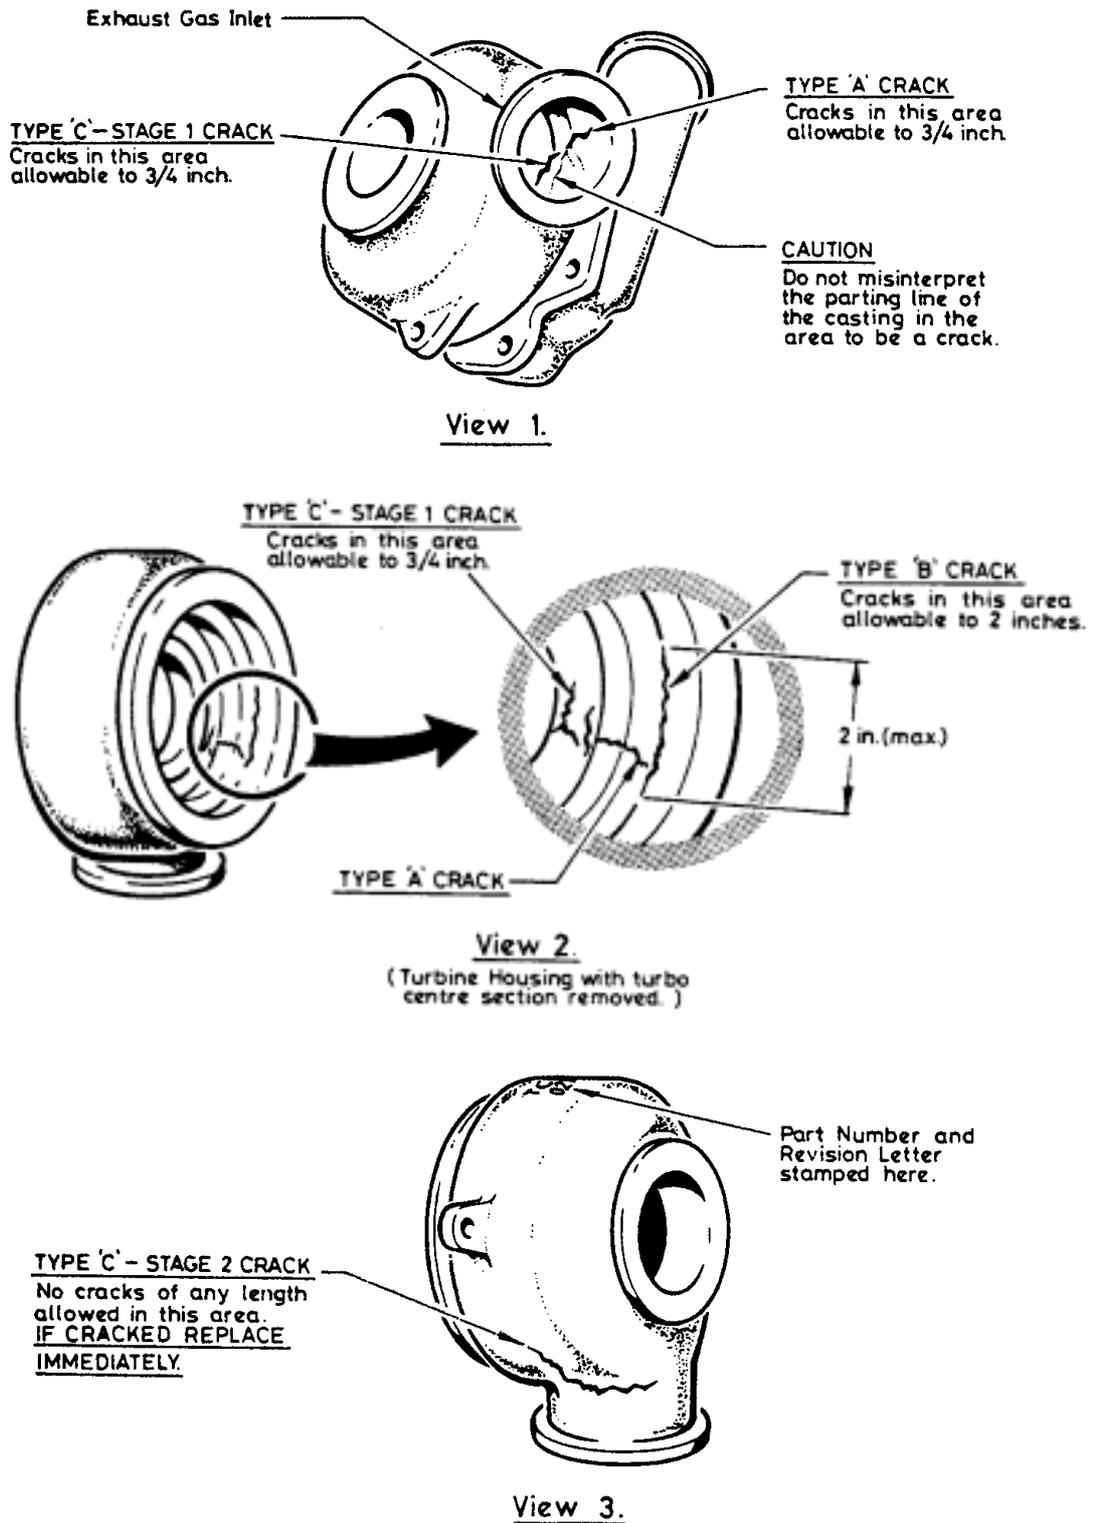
TURBINE HOUSING - INTERNAL CRACKS.
